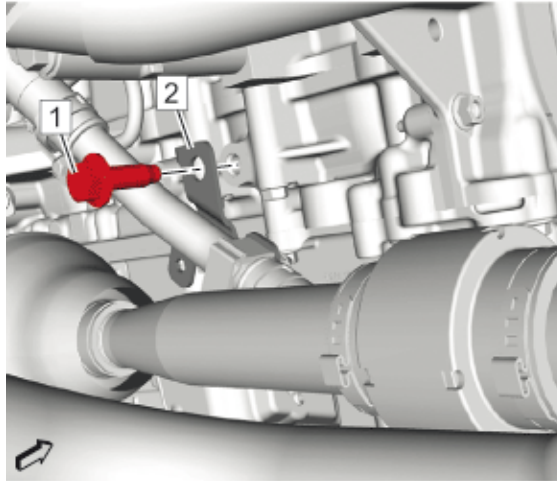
Heater Inlet And Outlet Hose Bracket And Bolt
